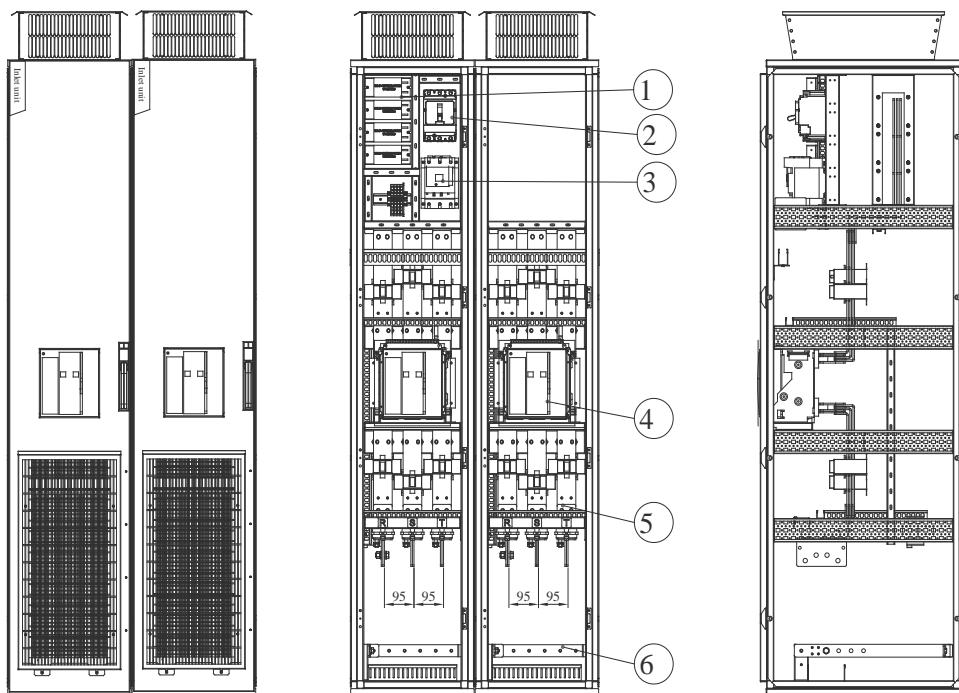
12-Pulse Frame Breaker Inlet Unit Structural Layout
